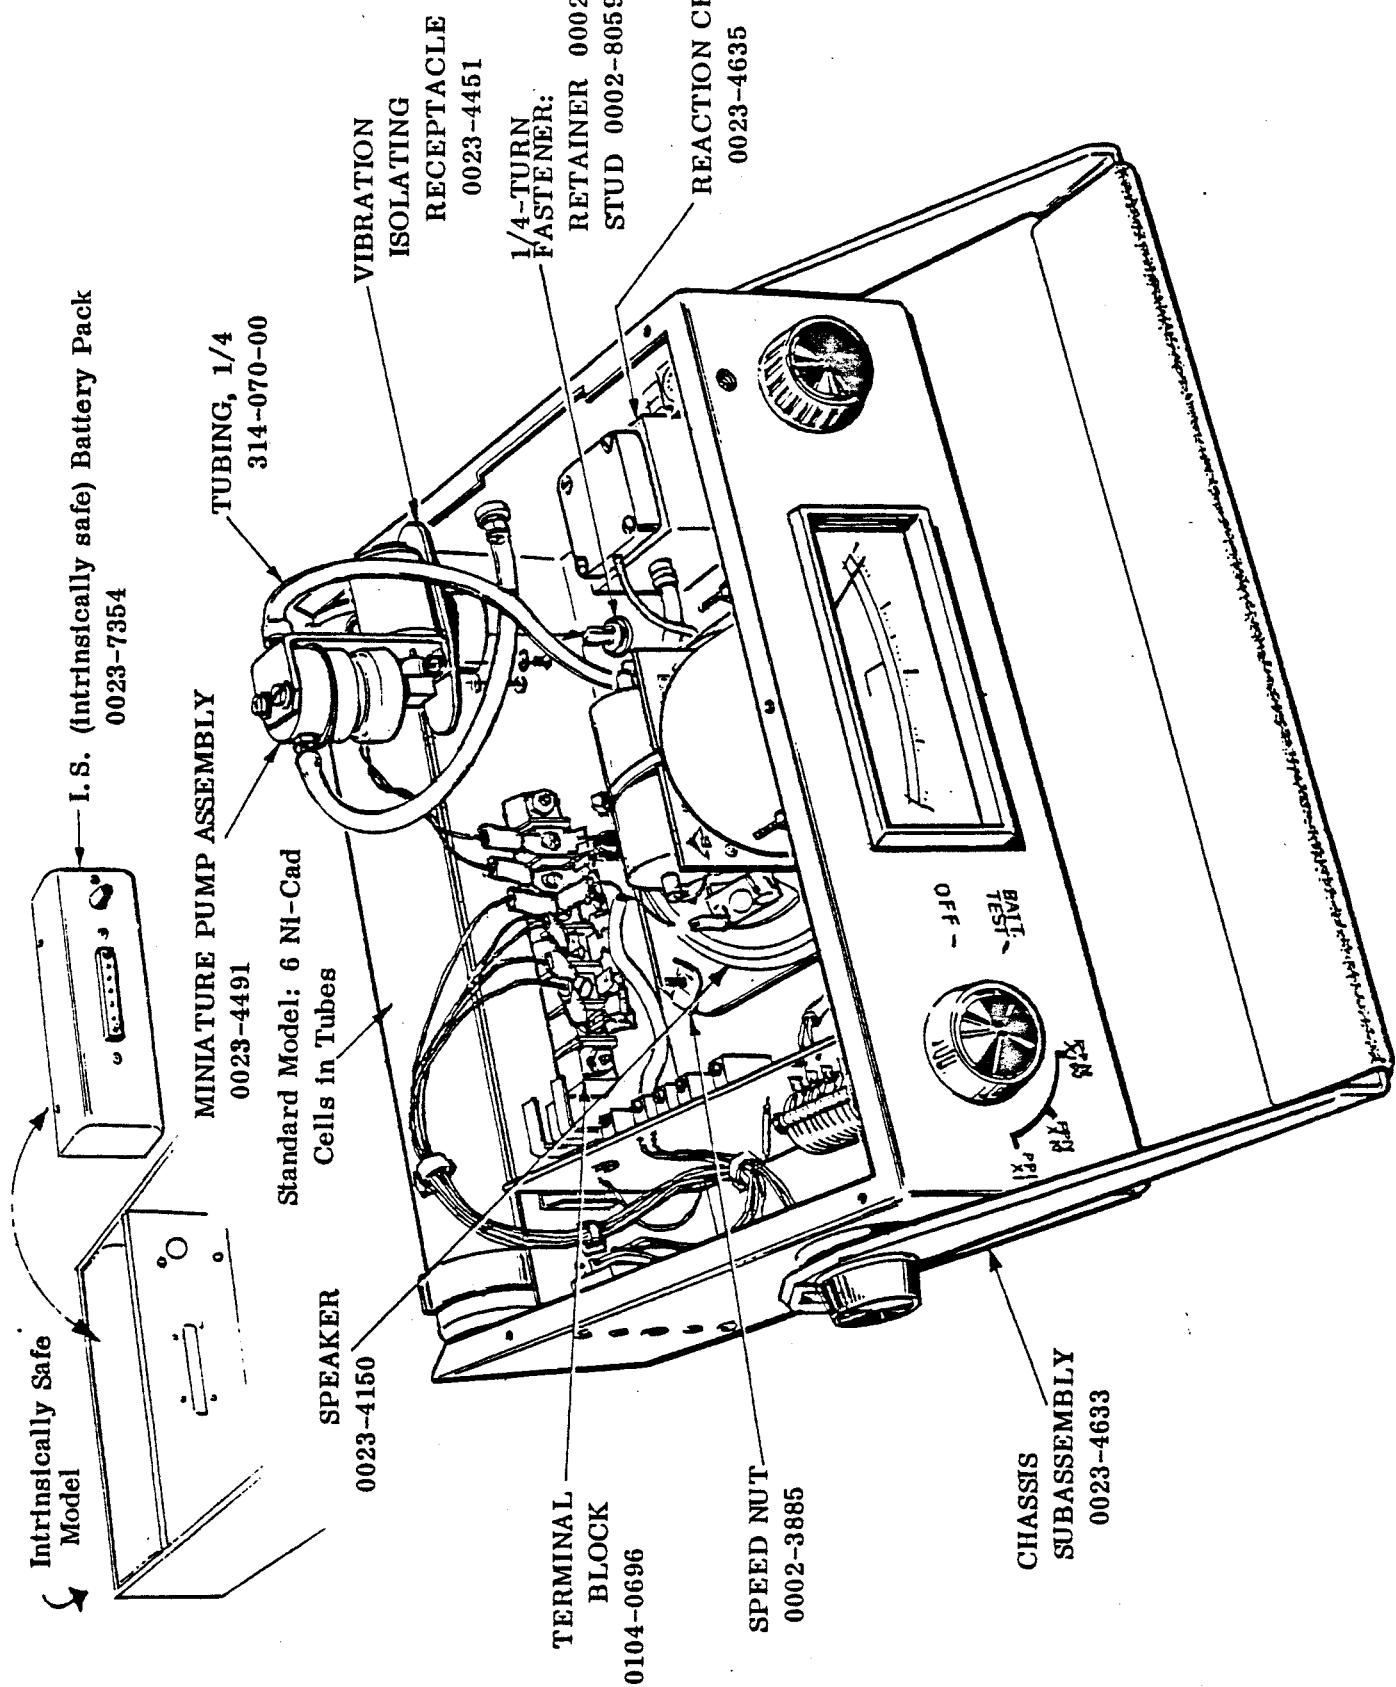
TLV Sniffer Chassis Subassembly Showing Miniature Pump Assembly in Disassembled Position.
